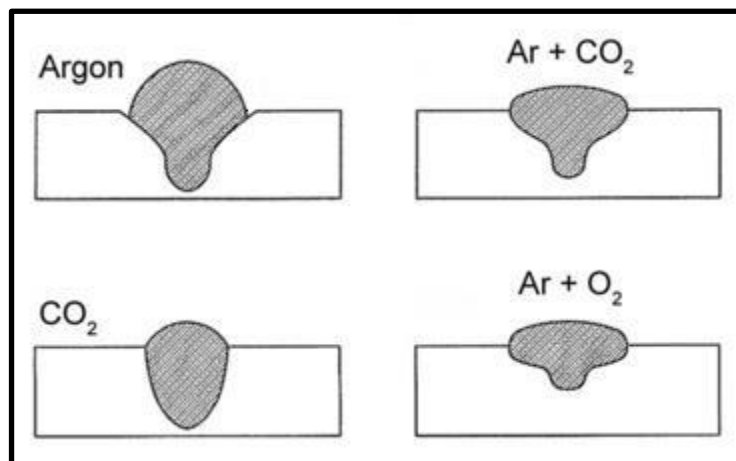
The effect of shielding gas composition on the weld penetration and bead shape for steel.⁵
